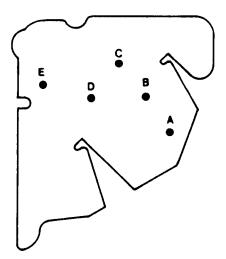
Cassette right-hand plate Stub shafts are installed at gear positions A, B, C and D on the right-hand plate of the cassette. Gear position E is a bearing hole for the drive transfer spindle. Gear ratios in the diagrams on the following pages are overall, from the motor/gearbox output to the drive transfer spindle at E.
